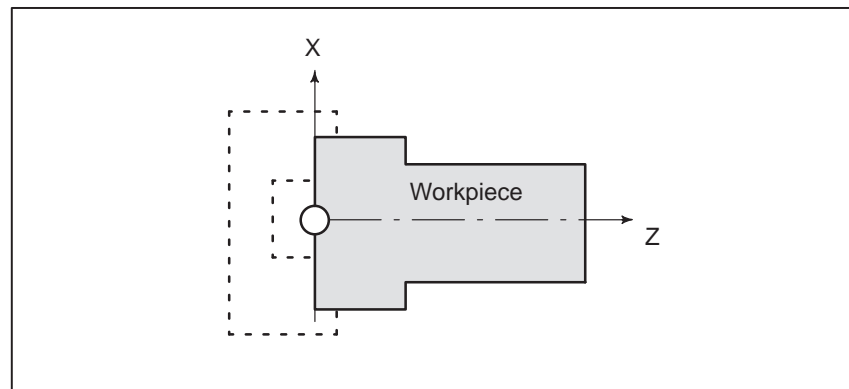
(d)Coordinate system on lathe as specified by CNC
